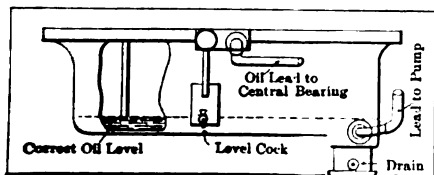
The crankcase of the S. G. V. car, illustrating the oil well in the rear end to provide suction for the pump
